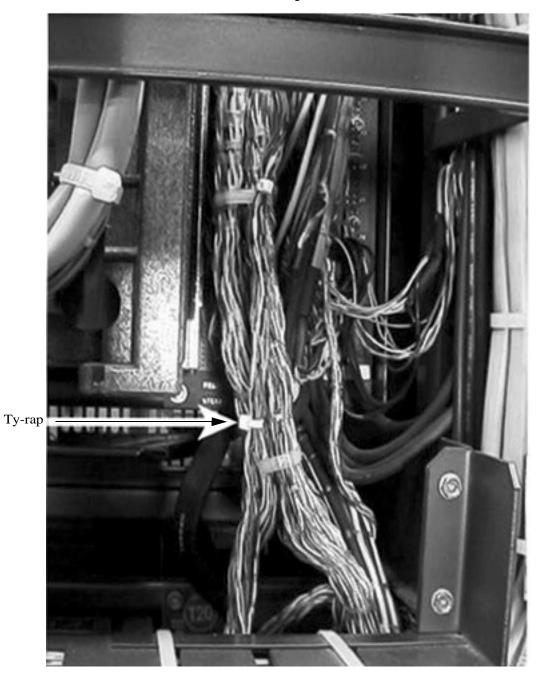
NT0X26DV Cable Forming Part 1 of 3
